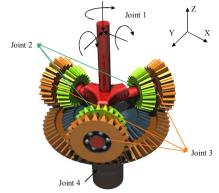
Perspective view of mechanism with its joints and main coordinate system
